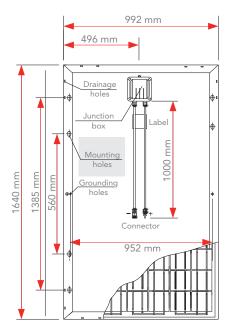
EXAMPLE OF MOUNTING HOLES, AS-P6 SERIES
